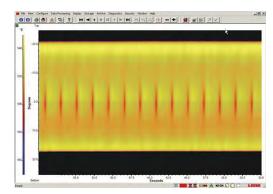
Coated strip showing cold stripes caused by an eccentric roll.
